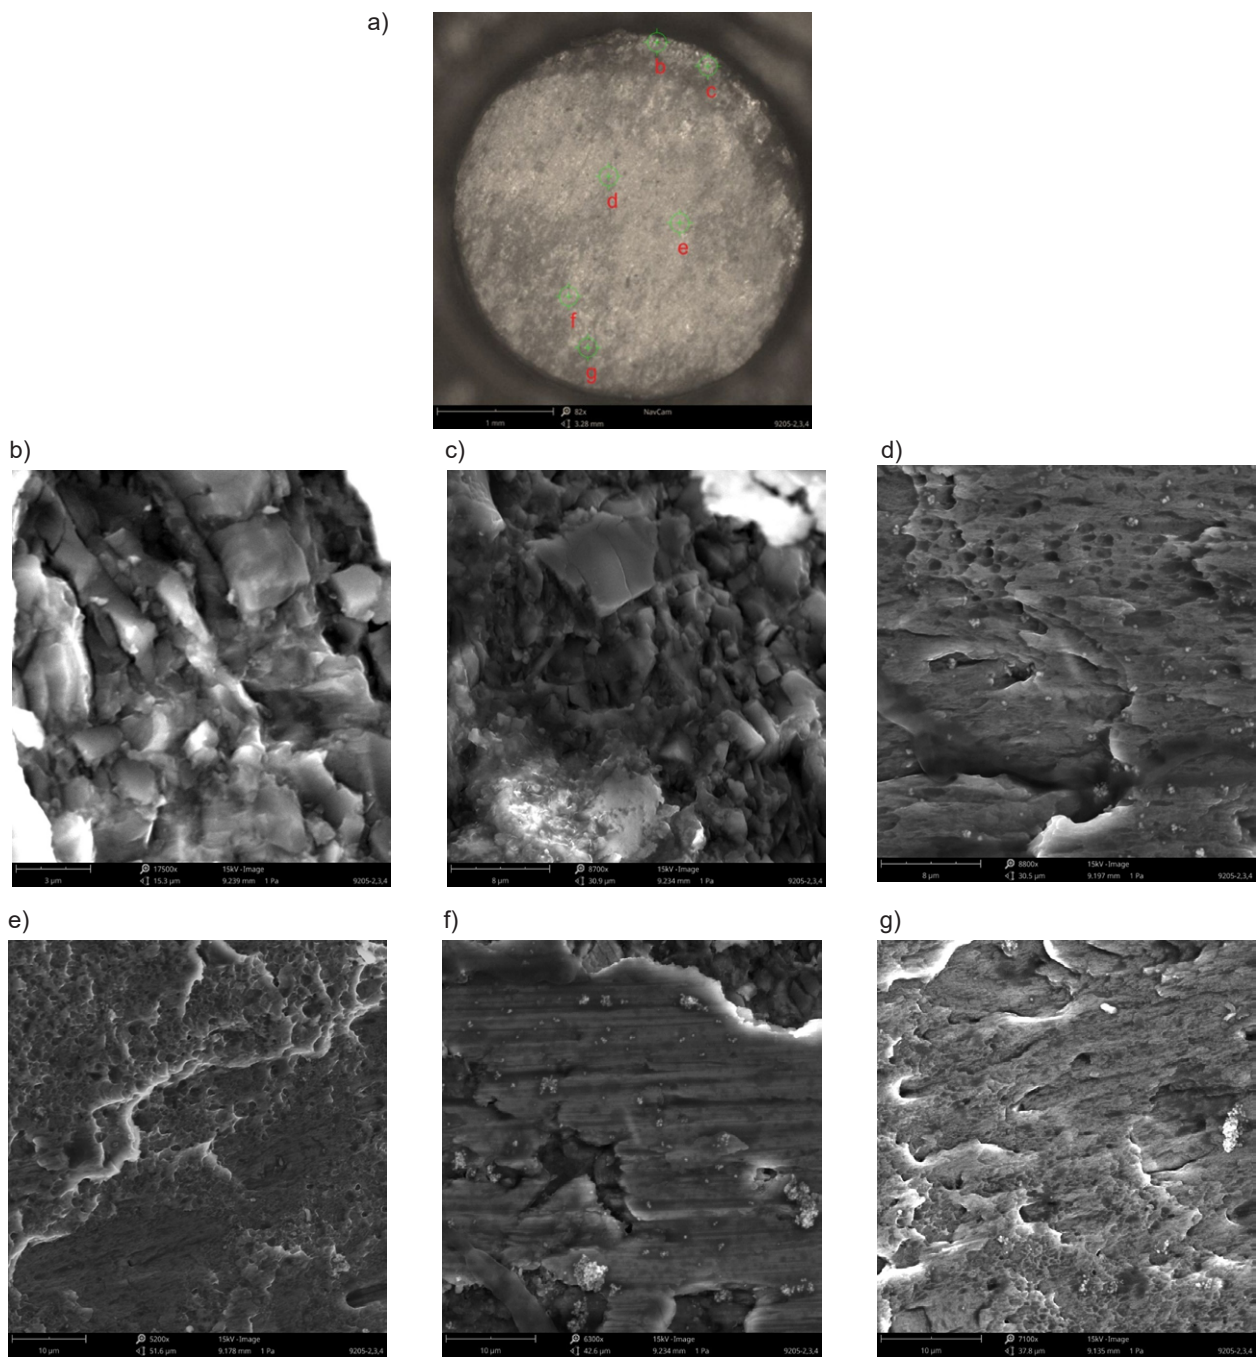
Fracture surface of sheared rivet: a) macrograph of whole surface; b) - g) SEM micrographs showing the fracture surface morphology of characteristic areas
